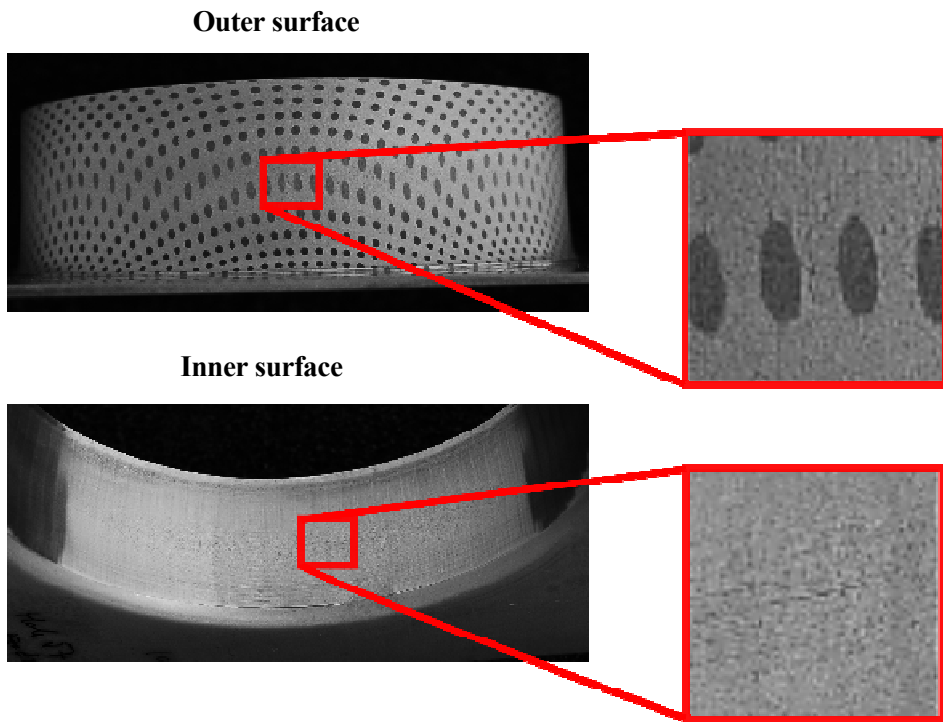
Worst surface quality of the flange obtained in the test with a 10 mm tool radius, 57 mm initial hole diameter and 0 rpm spindle speed: tiny microvoids at the outer surface and grooves in the inner surface follow the forming tool path
